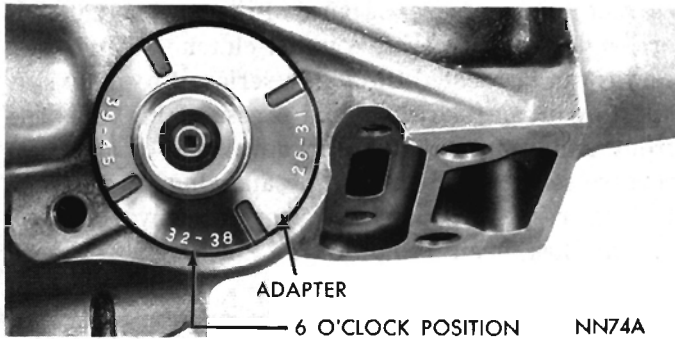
Speedometer Pinion and Adapter—Installed (Retainer Removed for View)
